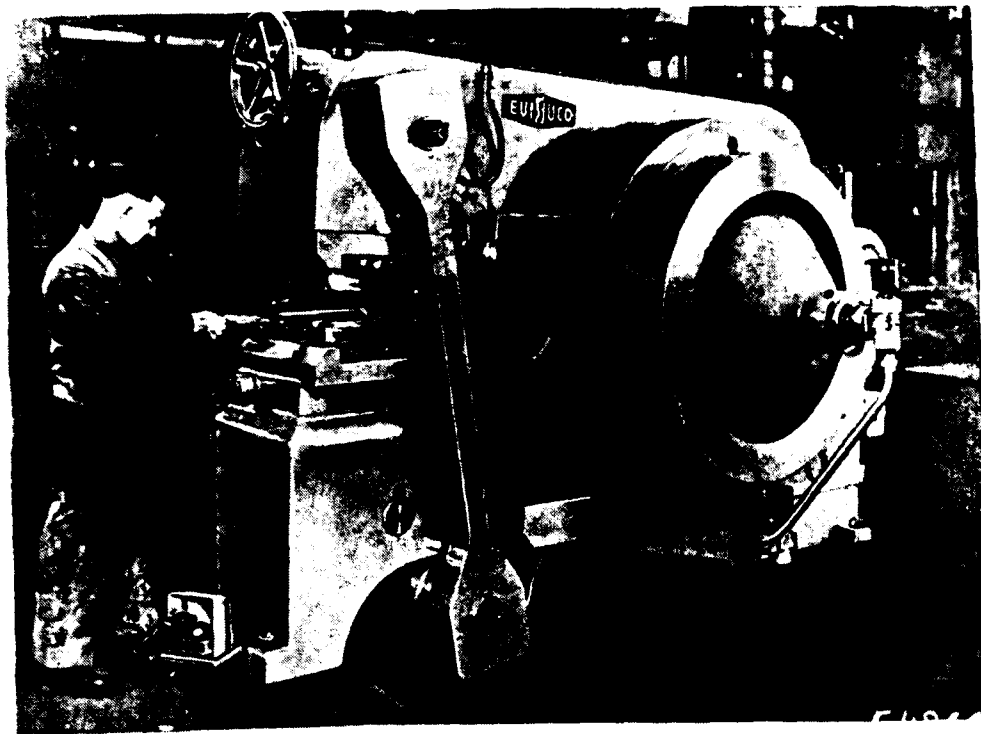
Horizontal Forging Machine with tongs gripping: Handwheel for the adjustment of gripping power.
